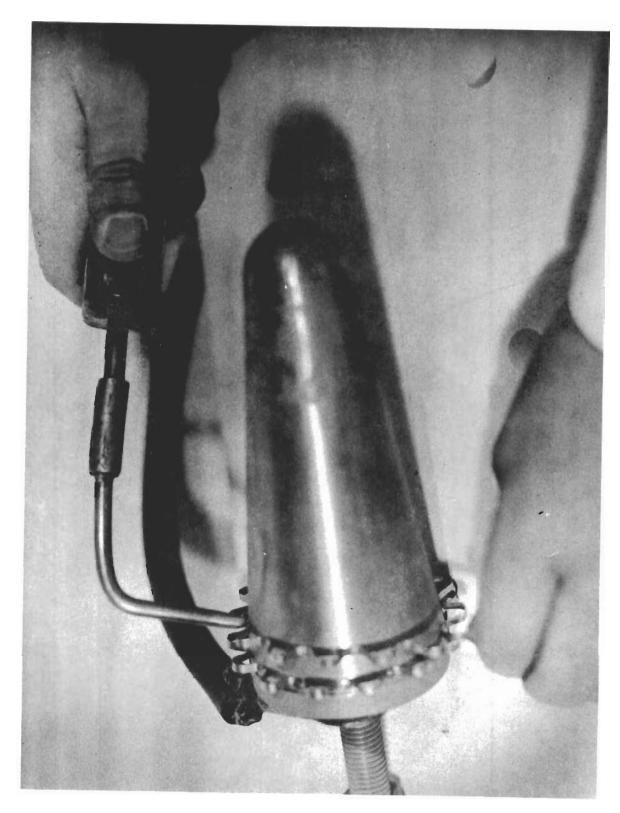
Welding Reinforcement Strip on Model Nose Cone
